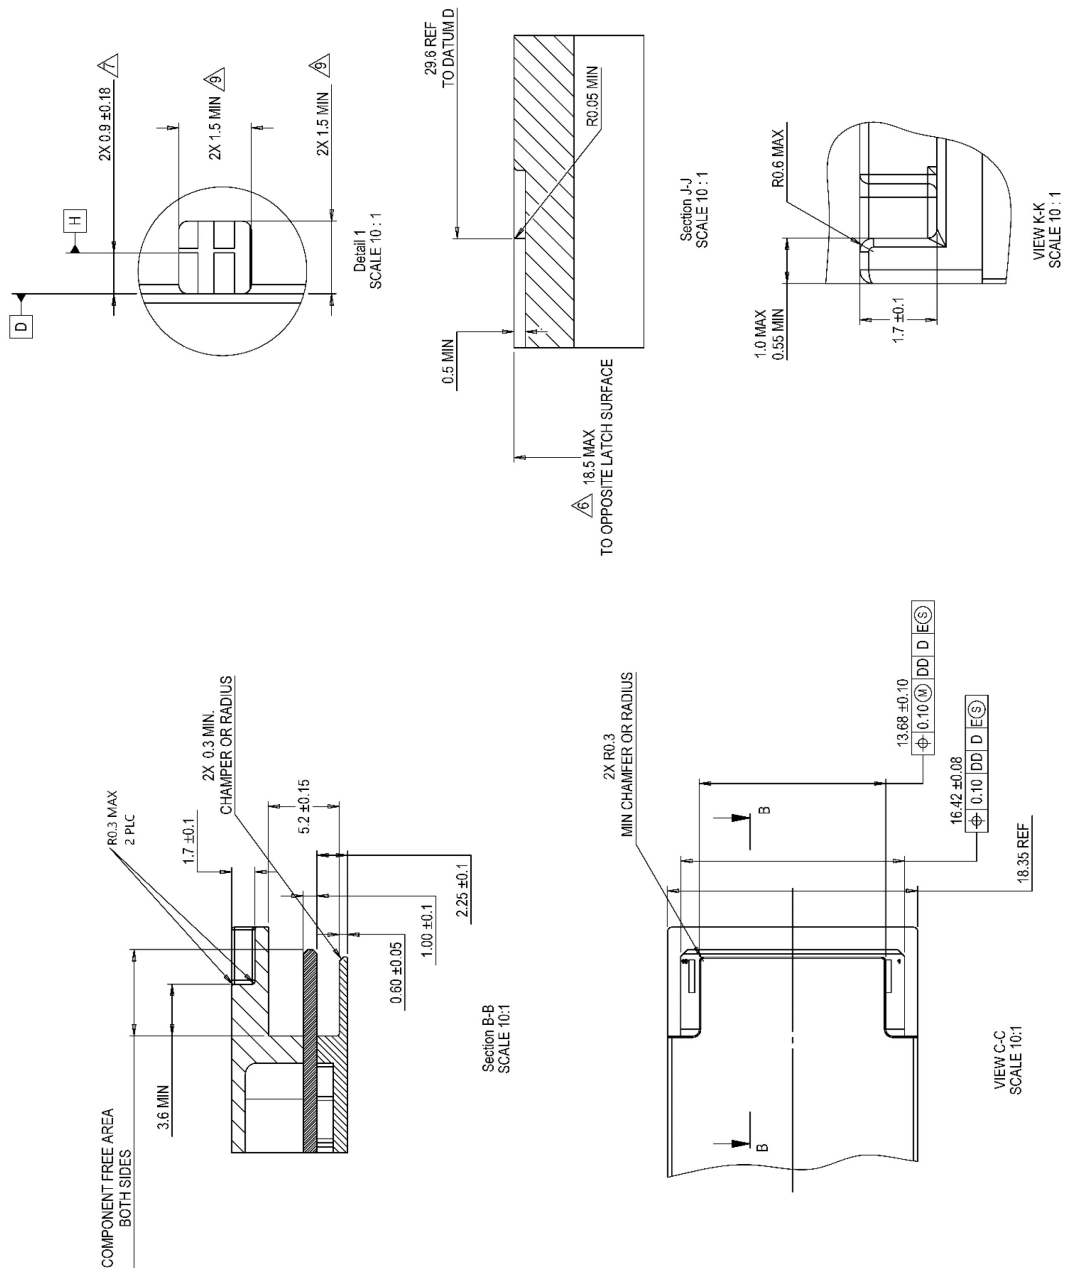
Drawing of QSFP112 module (Part 2 of 2)
